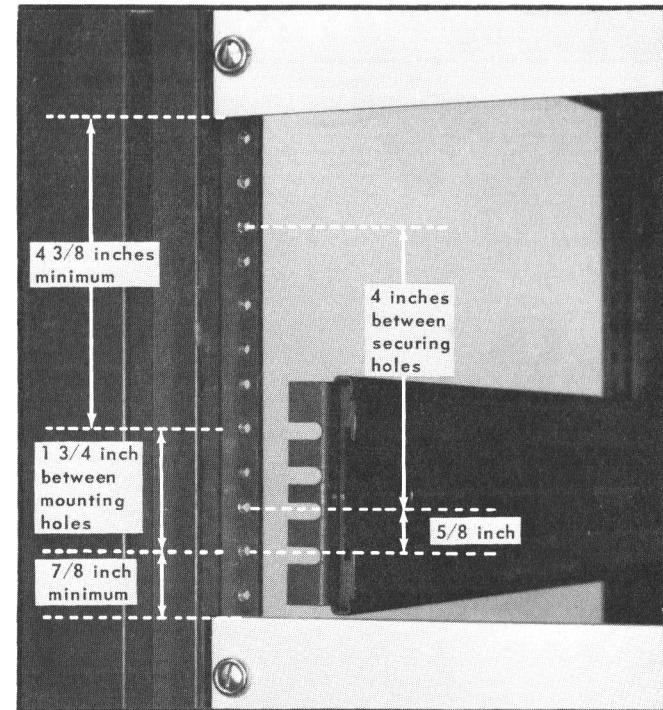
Vertical mounting position for front end of slide-out tracks.
